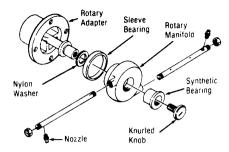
REVOLVING WASH SPRAY ASSEMBLY.
